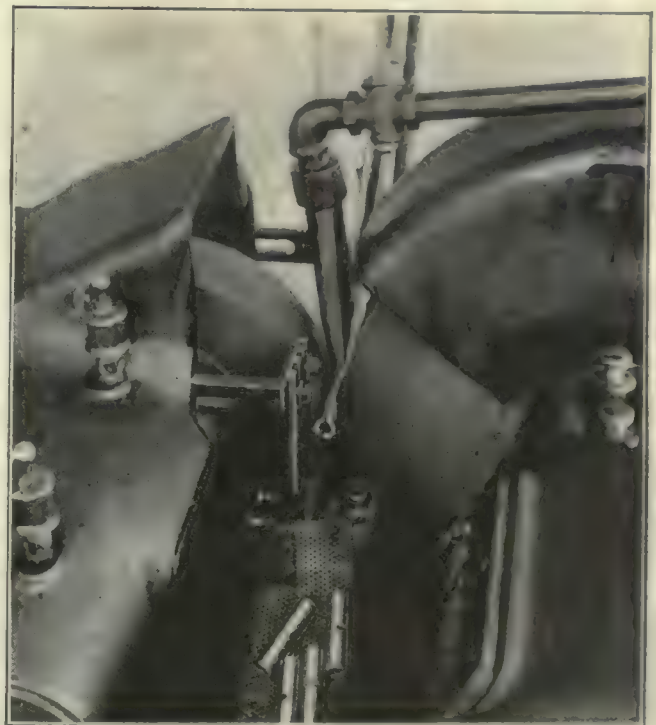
CINCINNATI GRINDING MACHINE WORKING ON PISTON PINS
